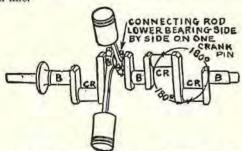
A regular four-cylinder type, 180° crank shaft is used on the eight-cylinder "V" type of engine. Two connecting rods are placed on one crank pin, either side by side, or voked (see Fig. 28).
